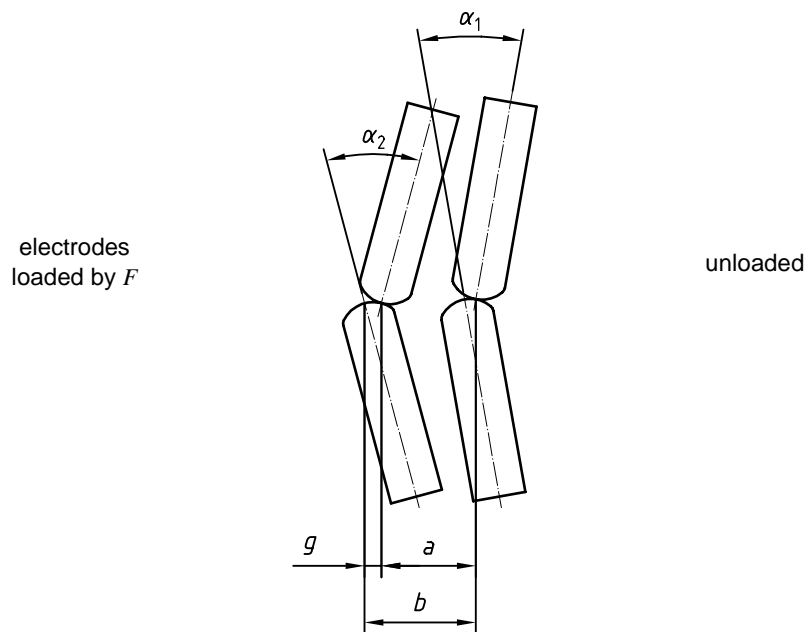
Contact fault of spot and seam welding equipment
